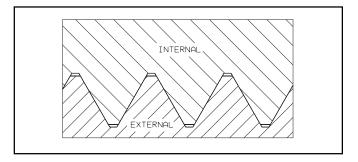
NPT — Wrench Tight-No Crest-Root Contact, Flank Contact Only
